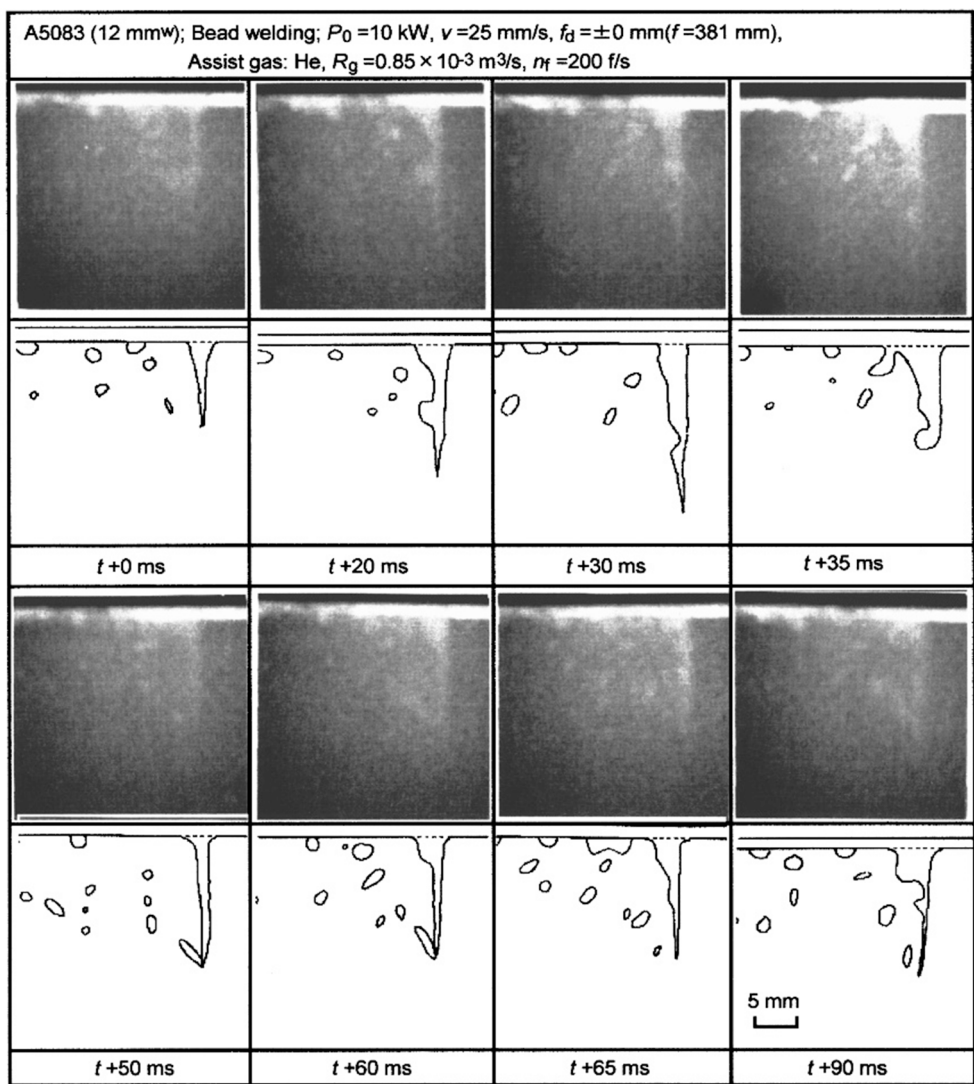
Laboratory x-ray imaging of keyhole porosity in laser welding. Reprinted with permission from Ref. [111].
